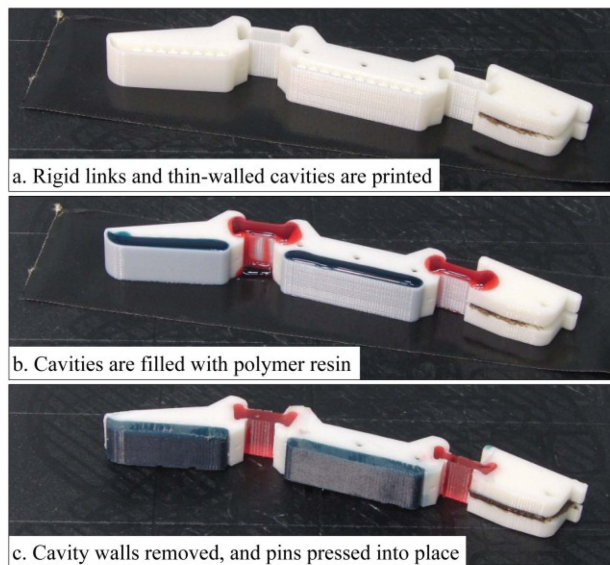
Finger molding process: (a) 3D printed finger has cavity with 0.7mm thick shell. (b) Liquid rubber mold is poured into the cavities and cures within the 3D printed framework for 16-48 hours. (c) Cavity shell is removed, and additional pins are added for the final result.
